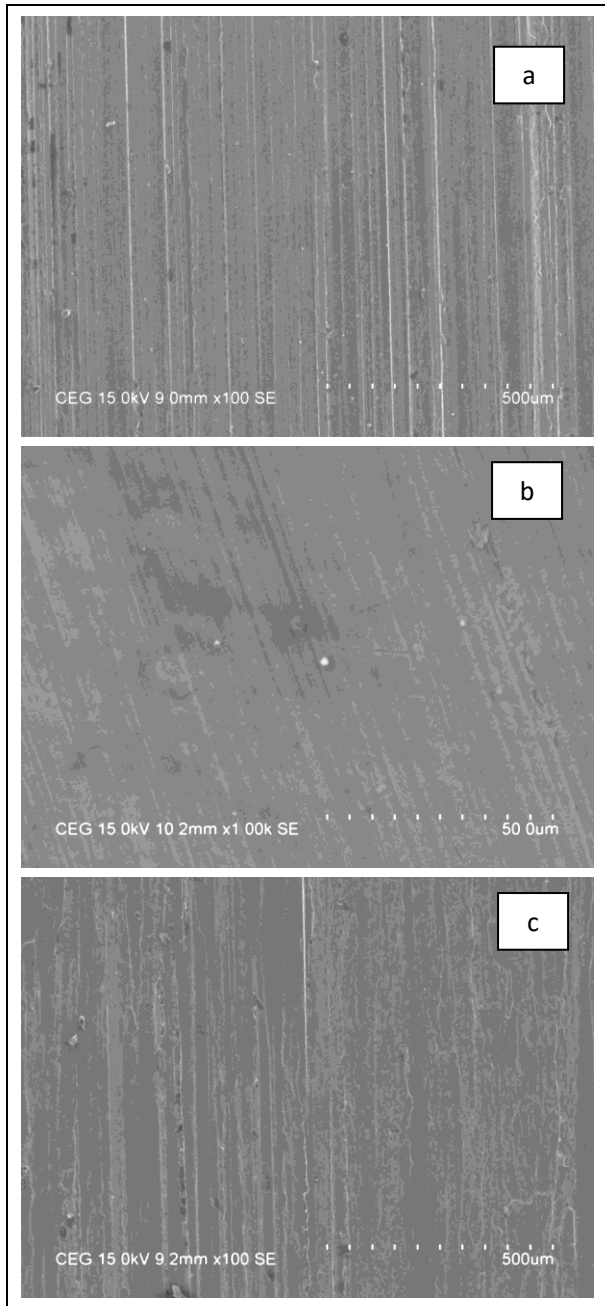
Microstructure of the hole surface after machining with (a) Wet oil coolant (b) LN₂ coolant (c) CO₂ coolant
